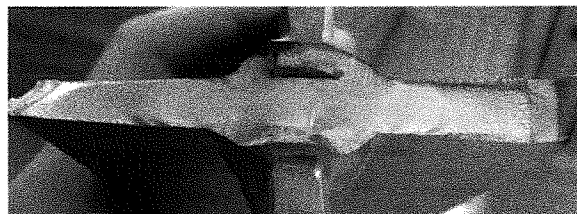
Crack initiation on shot peened joints (weld root)
